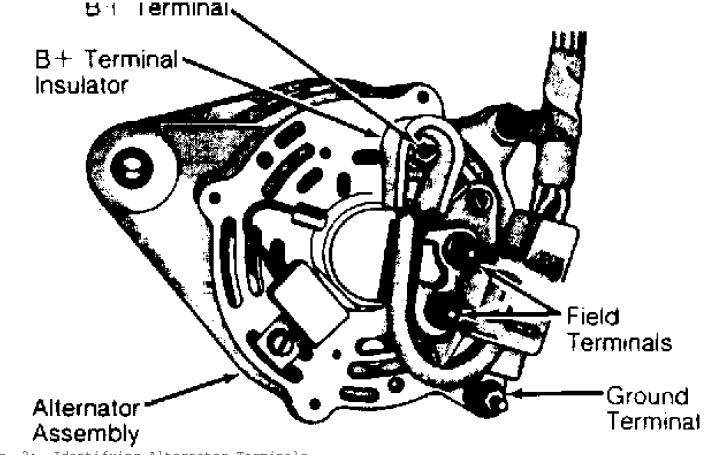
Identifying Alternator Terminals Courtesy of Chrysler Corp.
